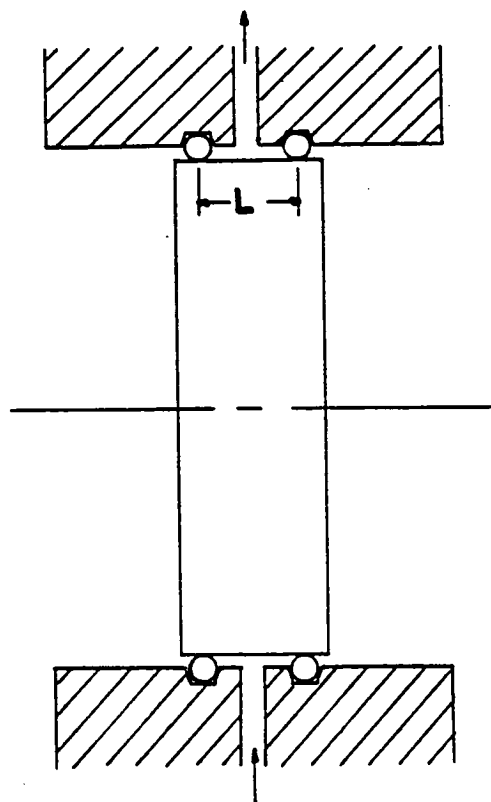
Port Inlet/Outlet With O-Ring End Seals
